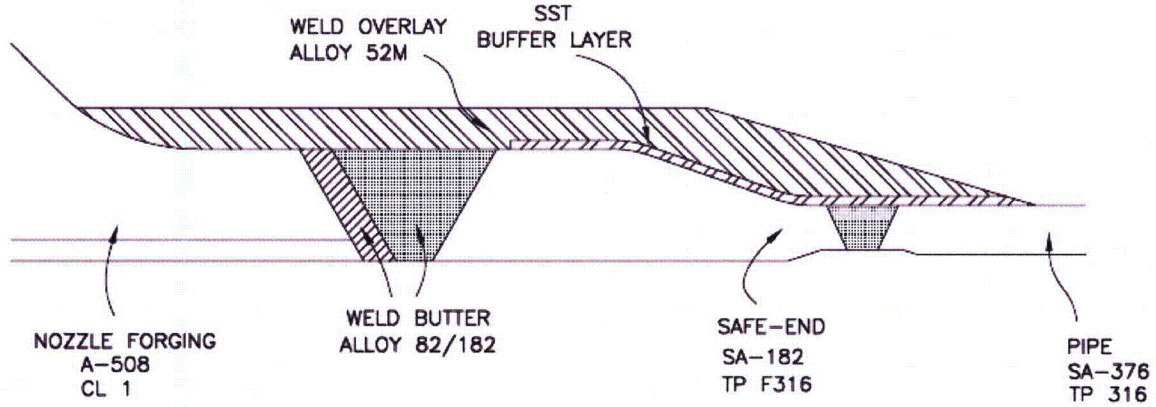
Illustration of Weld Overlay Design for Davis-Besse Pressurizer Pressure 2 1/2" Pressure Relief Nozzle
